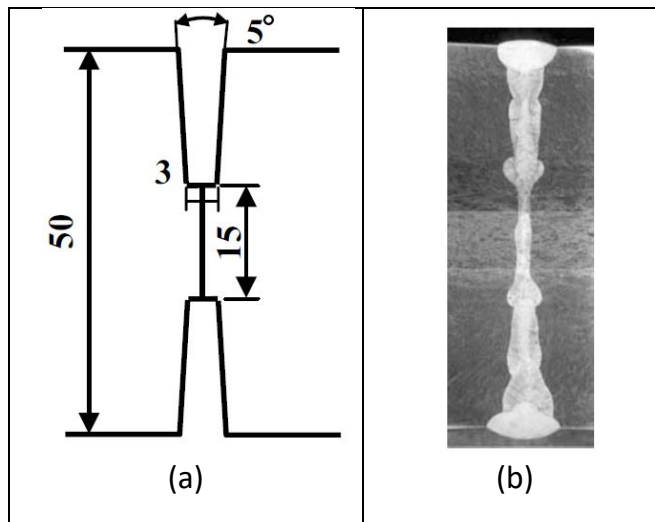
Example of double sided narrow gap groove geometry (a) used for welding of 50 thick type 316L austenitic stainless and a resultant multi-pass weld cross-section (b) produced with using a combination of laser welding and laser welding with filler wire. (Zhang et al., 2011)
